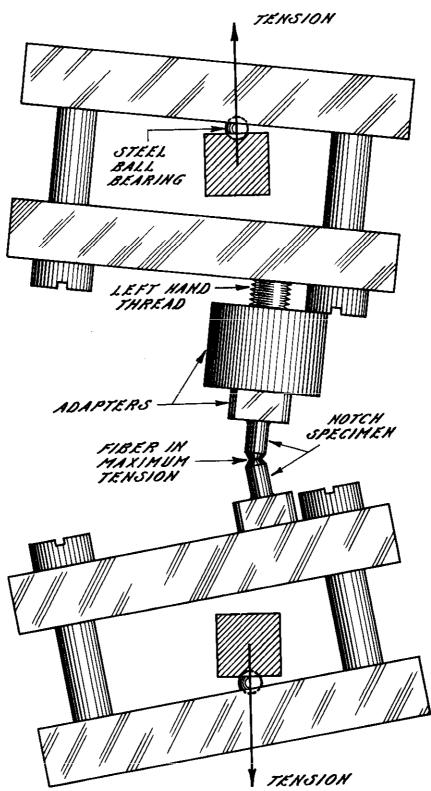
METHOD OF LOADING TO OBTAIN 4/4 INCH ECCENTRICITY (ECCENTRICITY AND THE POSITION OF FIXTURES ARE EXAGGERATED).
